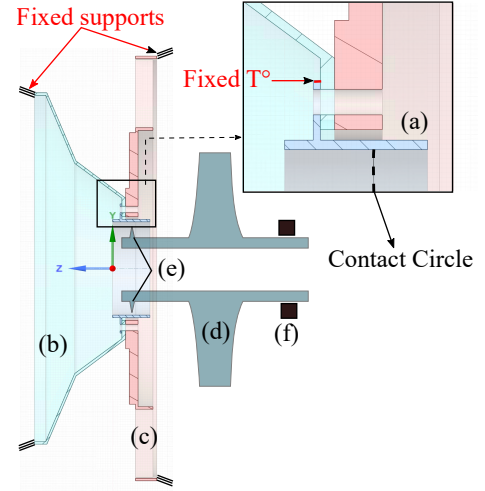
Rotor-stator system with boundary conditions and contact zone: (a) ring, (b) diffuser, (c) distributor, (d) turbine, (e) labyrinth, (f) rear bearing.
